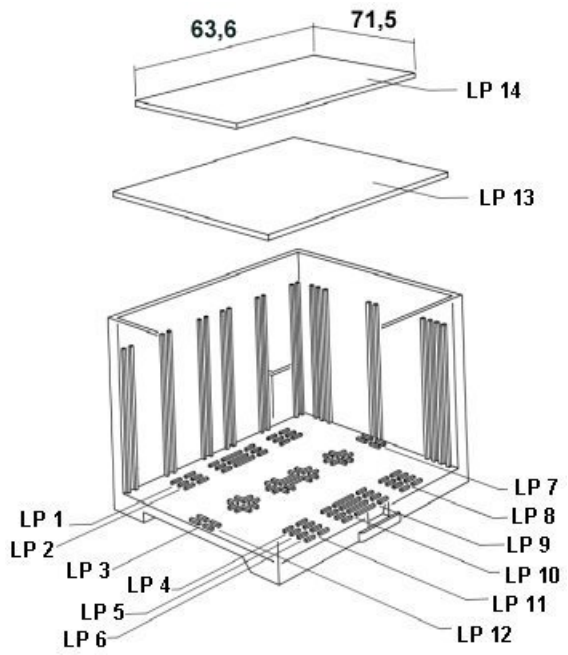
Explosion drawing 1 - Valid for PCB 13.
